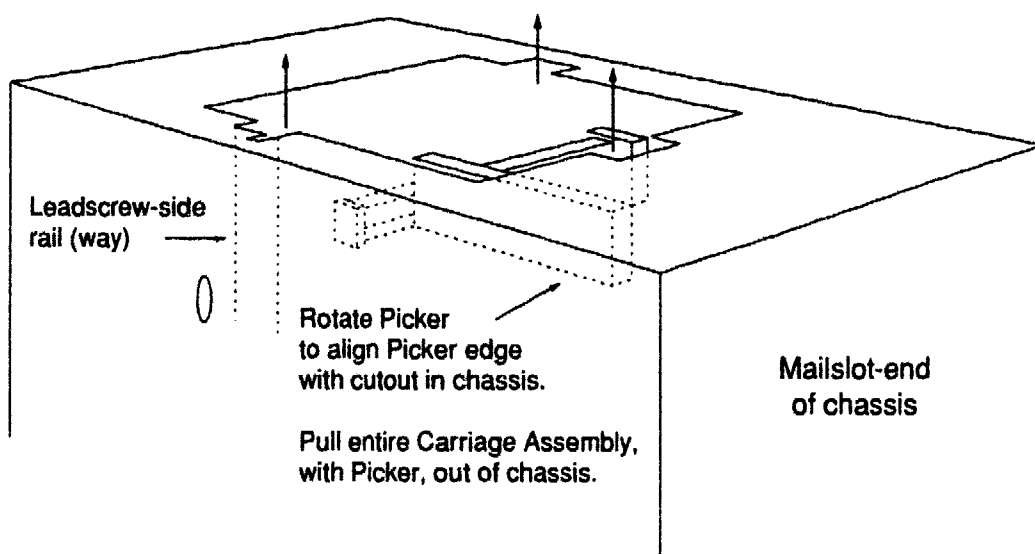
Removing the Carriage Assembly and Picker as a Unit
